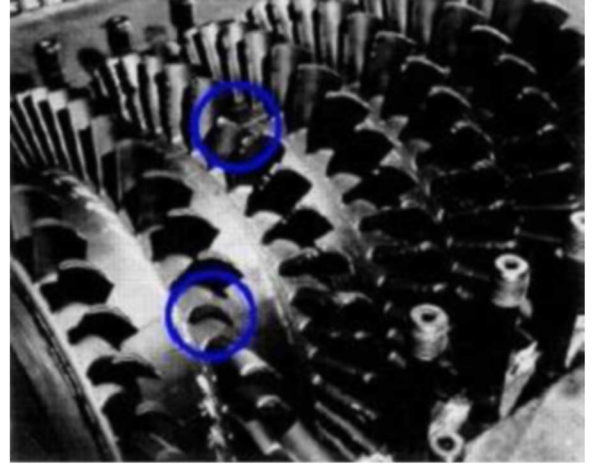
Blade fracture in a high pressure turbine [31].
